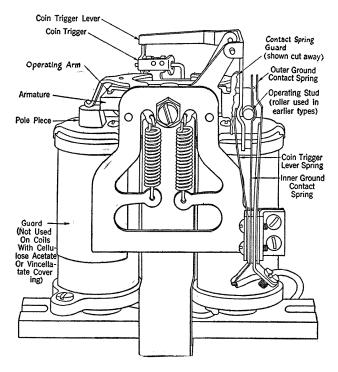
Coin Relay-Earlier Design of Magnet Shown
